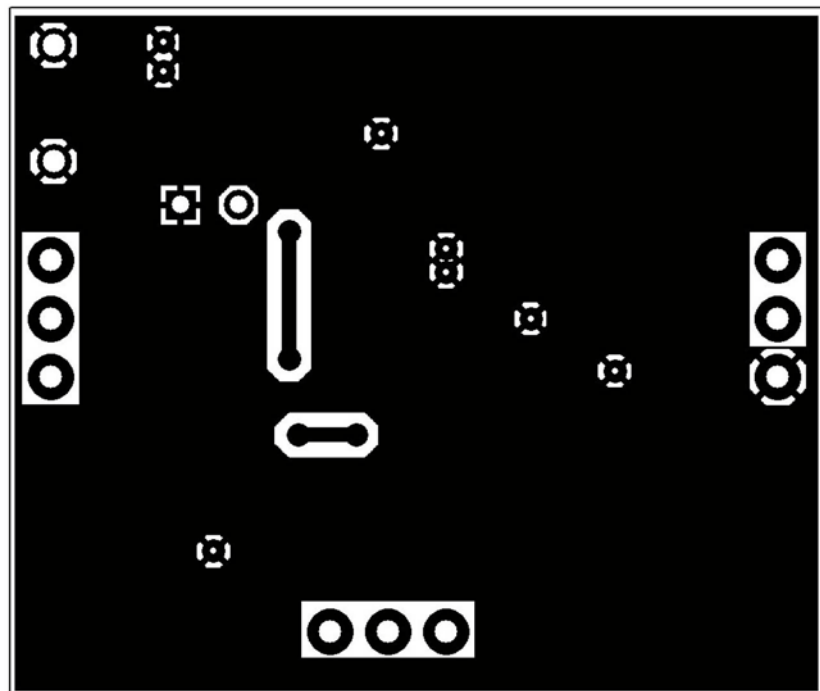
Atmel ATA6663/ATA6664 Development Board; Bottom Side, Top View (Transparent PCB View)
